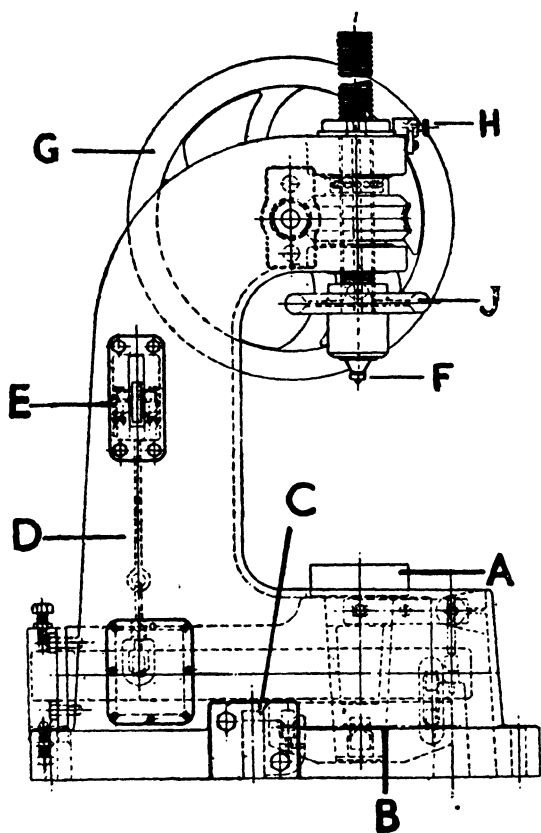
DIAGRAMMATIC VIEW OF BRINELL MACHINE
